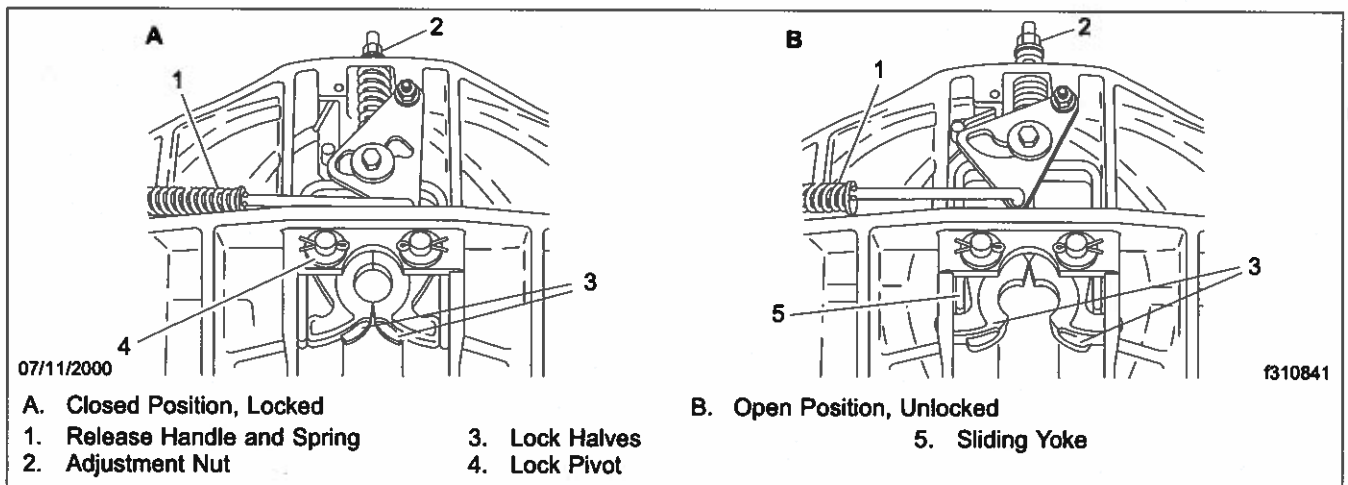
, Type B Kingpin Lock Mechanism (bottom view)
